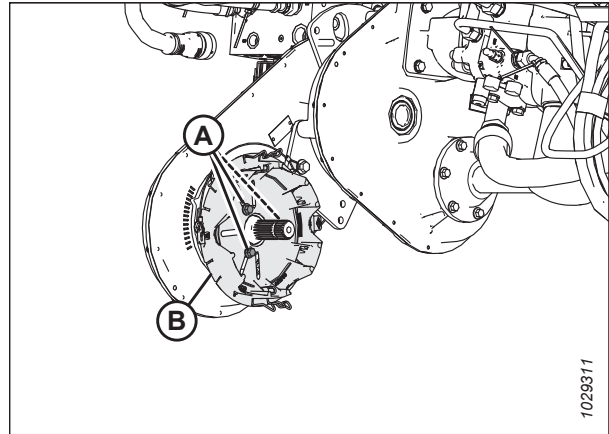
Completion Gearbox Chain Tensioner Cover
